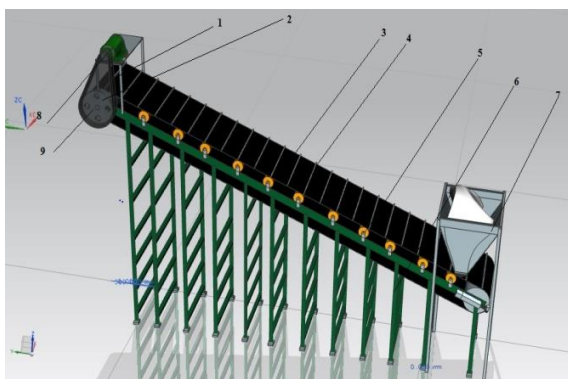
Conveyor belt with racks 1 - drive belt, 2 - drive drum wheel, 3 - belt, 4 - rake, 5 - roller, 6 - rigid metal frame, 7 - tank, 8 - electric drum drive motor, 9 - belt guard
